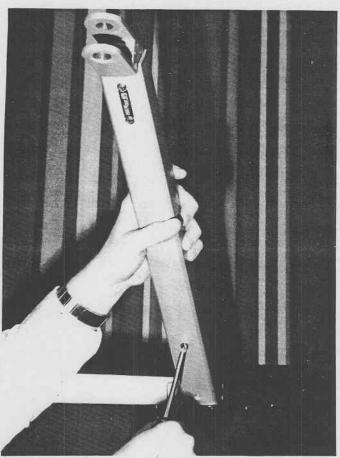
LIFT UP TO INSTALL REAR SCREWS
